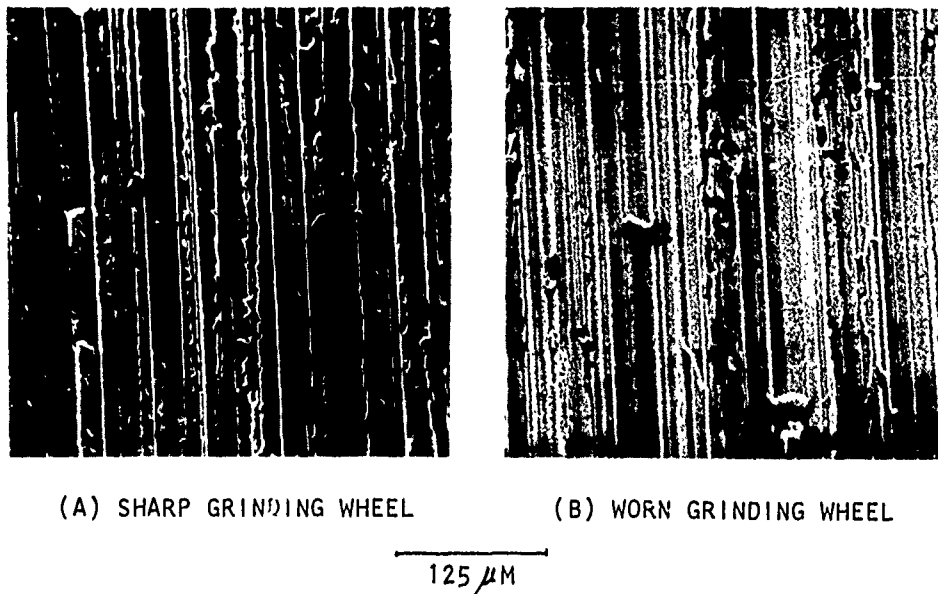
Ground surfaces showing the ploughing and side displacement of workpiece material in grinding.
